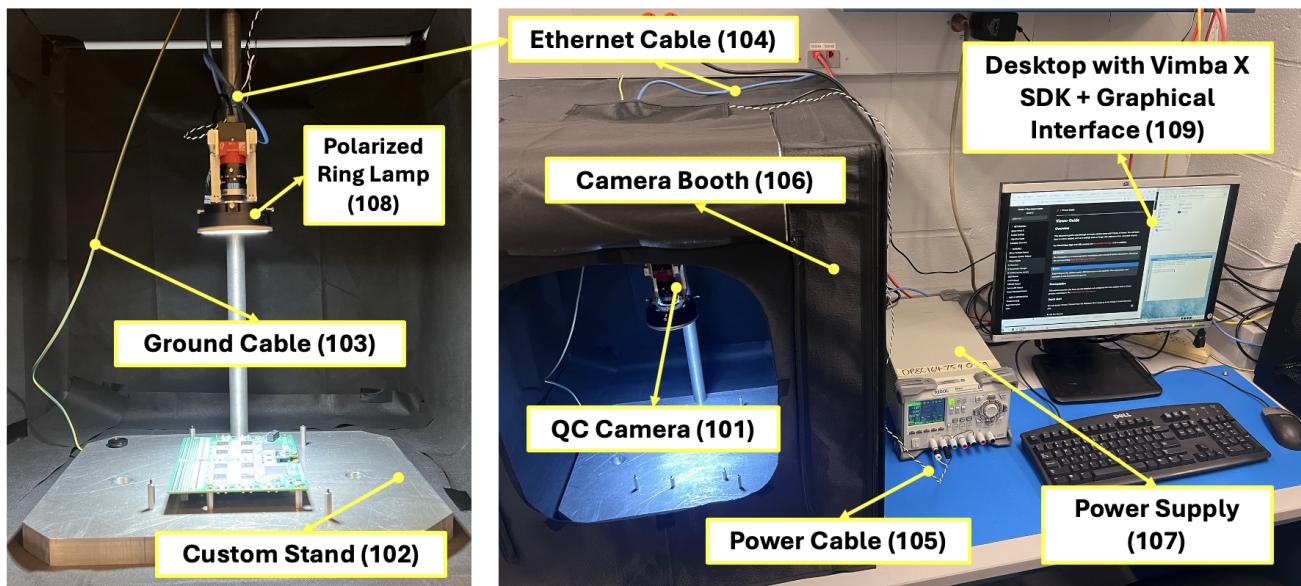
Equipment needed to operate the Post-Assembly FEMB Visual Inspection Setup.
